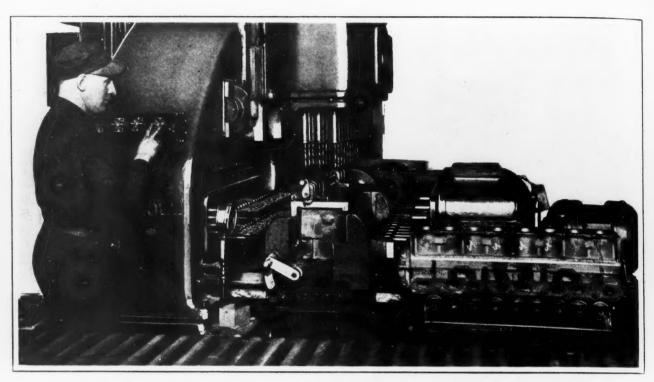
Four-way Machine on which One Hundred and Sixteen Holes are Drilled Simultaneously
